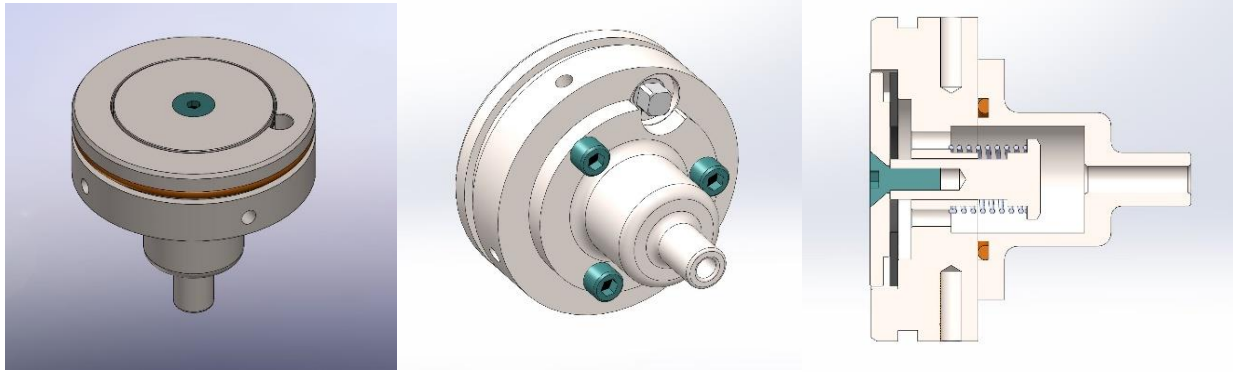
[from left to right] top-front view of assembly, bottom-side view of assembly with plug visible, cross-section of assembly.
